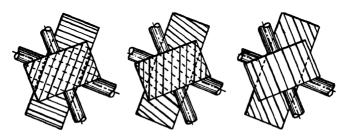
Spiral Angles Altered, but Shaft Angles Equal
